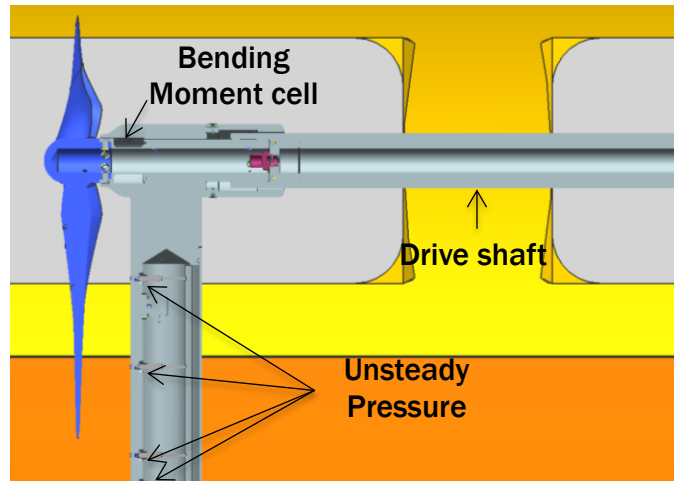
Close-up view of the turbine/nacelle/tower/driveshaft assembly
